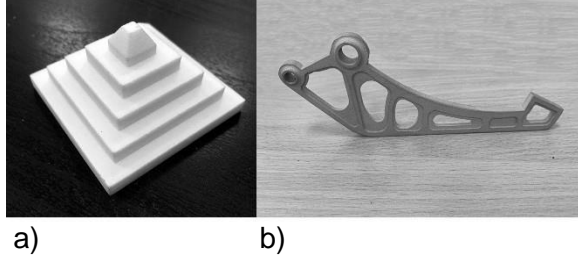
Test parts; a) Nylon 12 pyramid sample (50 × 50 × 28) mm fabricated by SLS; b) stainless steel 316L automotive sample (125 × 45 × 8) mm fabricated by LPBF.
